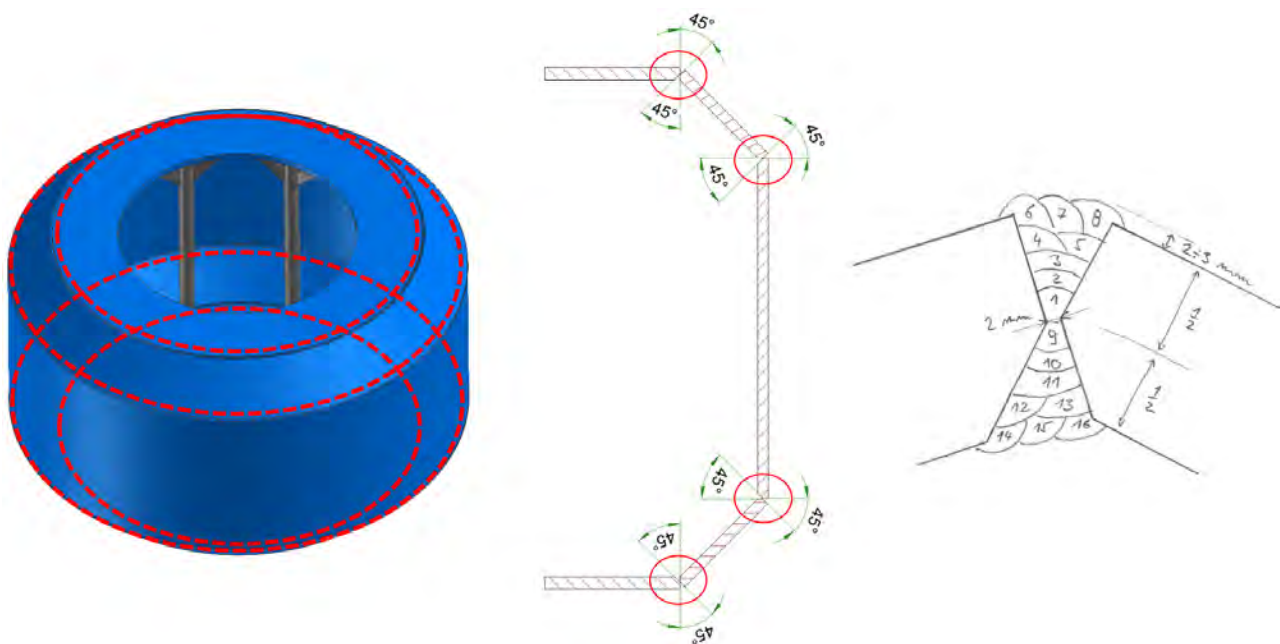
Circumferential welds of the outer sub-assembly, the corresponding bevel shape and layout of weld passes
